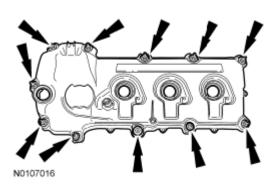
Locating Coil-On-Plugs Bolts Courtesy of FORD MOTOR CO.
